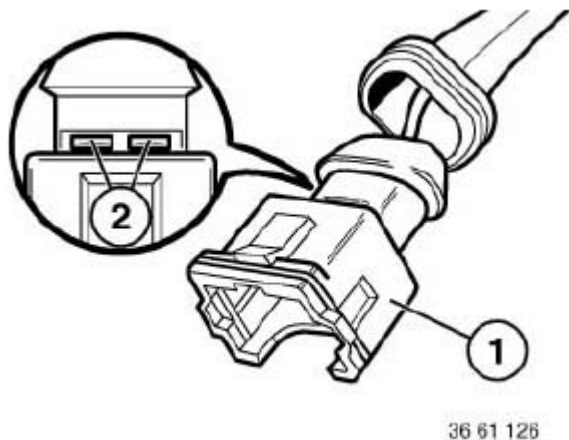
Identifying Ultrasonic-Welded Connectors
